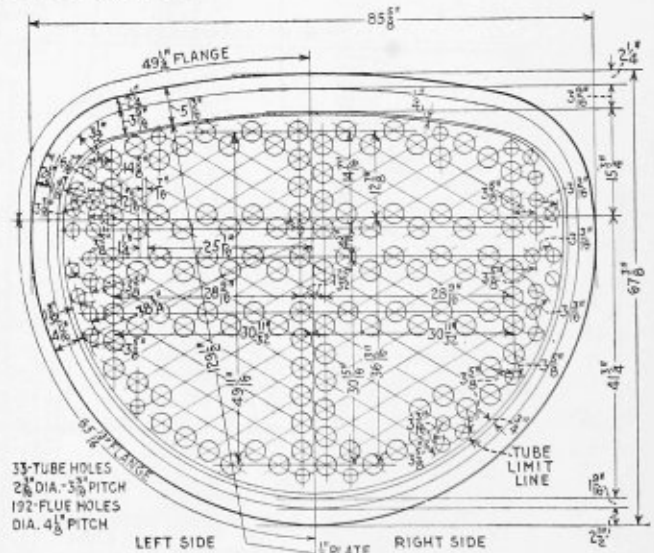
Firebox tube sheet used with combustion chamber boiler. Flue and tube arrangement as shown is for a type-E superheater installation
